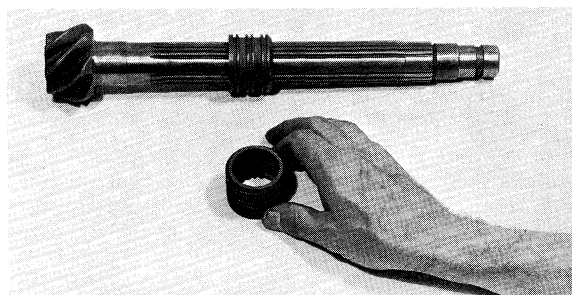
The sliding sleeve on this lift truck transaxle assembly has a 0.001-in. hole tolerance. It is made from 1144 bar stock with 30-35 Rc core hardness. Tufftriding is done after finish-machining to reduce distortion and increase wear resistance in both internal spline and external piston ring grooves. *Courtesy Clark Equipment Co.
